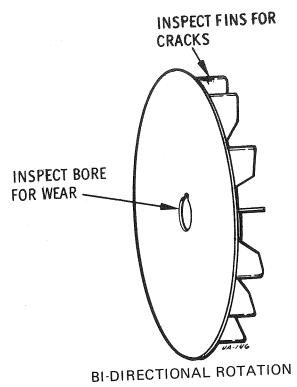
TYPICAL FANS AND INSPECTION POINTS
